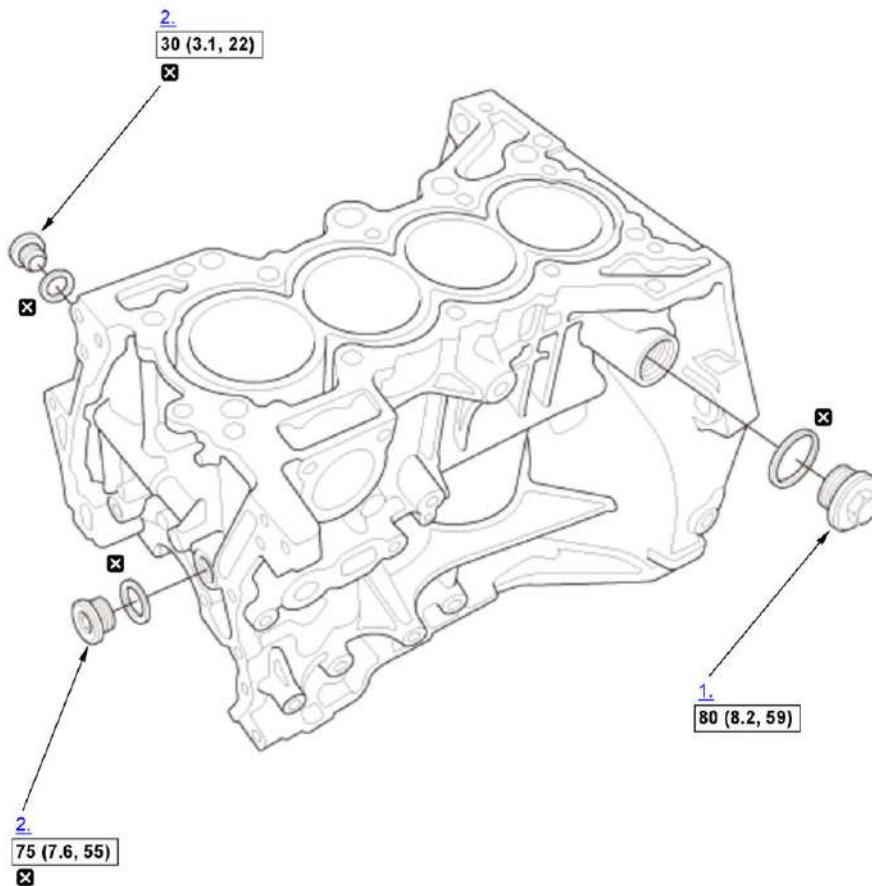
Engine Block Drain Bolt/Sealing Bolt Replacement Components With Torque Specifications (1.5 L Engine)
